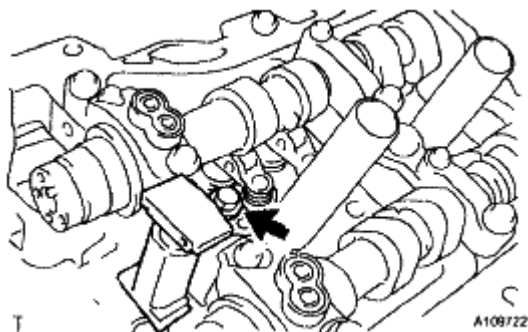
Identifying No. 3 Chain Tensioner Bolt
